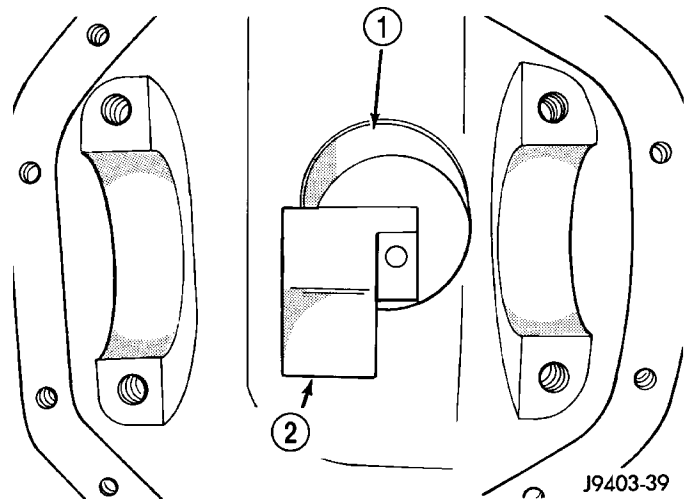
PINION GEAR DEPTH GAUGE TOOLS
